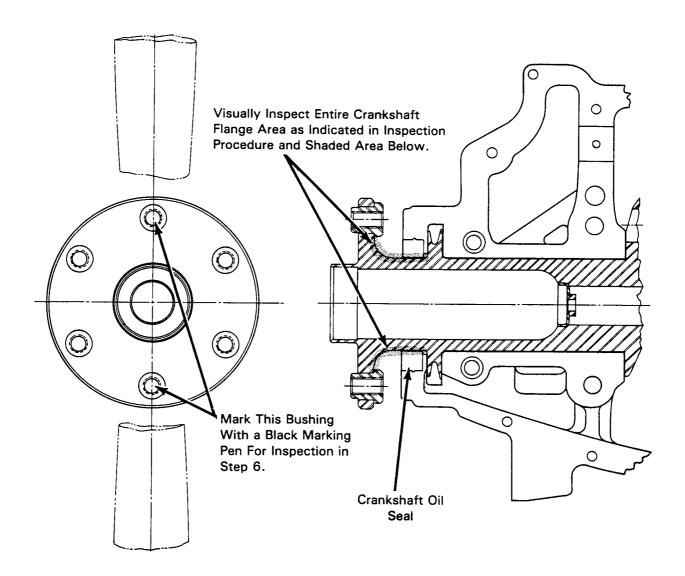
Visual Inspection of Crankshaft Flange Area
